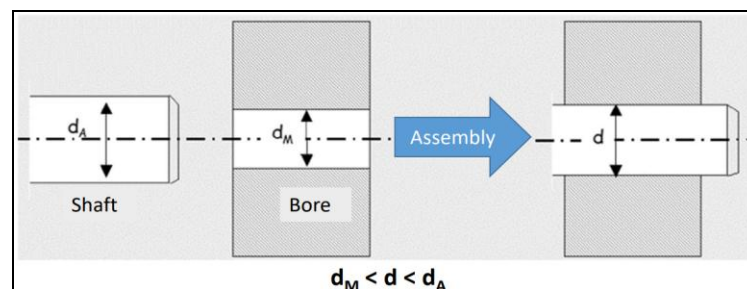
Dimensions of rotor and shaft interference fit prior to assembling
